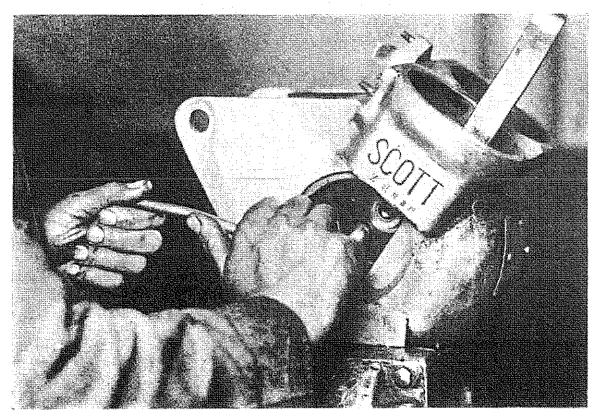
Undoing Left-hand Threaded Nut of Crankshaft Bolz.
